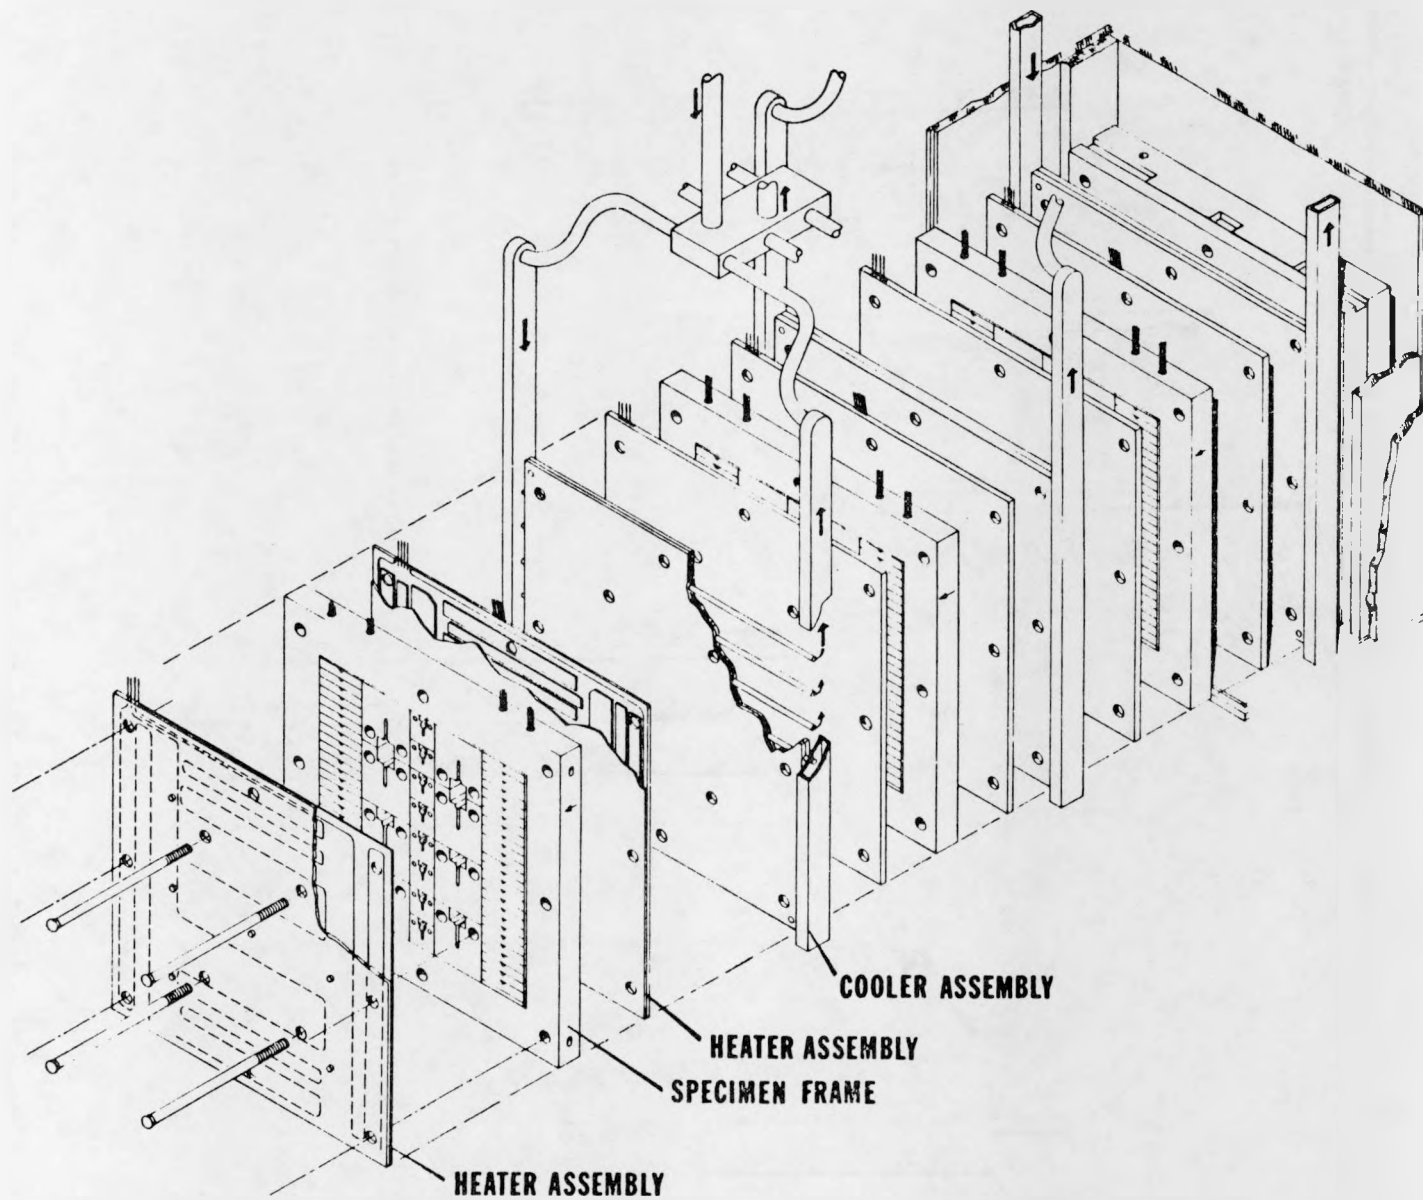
Exploded View of the Simulated Pressure Vessel Capsule. Neg 8010270-15.
